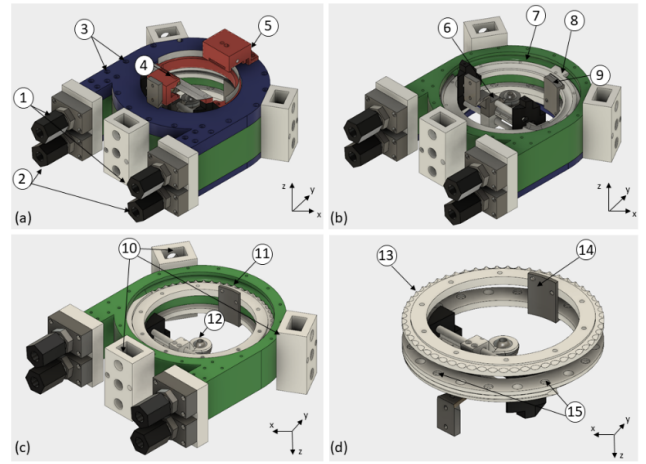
RTS Fusion 360 3D schematics: (1, 2) SMT tubing connector (3) Screw opening (4) Optical encoder and strip for translation (5) Optical encoder and strip for rotation (6) Tool carriage (7) Inner channel of DoF-1 (rotation) (8) Inner block (9) Extended piston (10) Mount slot (11) Inner channel of DoF-2 (translation) (12) Ball-and-socket A (13) Sprocket (14) Bridge connection (15) Ball bearing. See video for an exploded drawing and animation.
